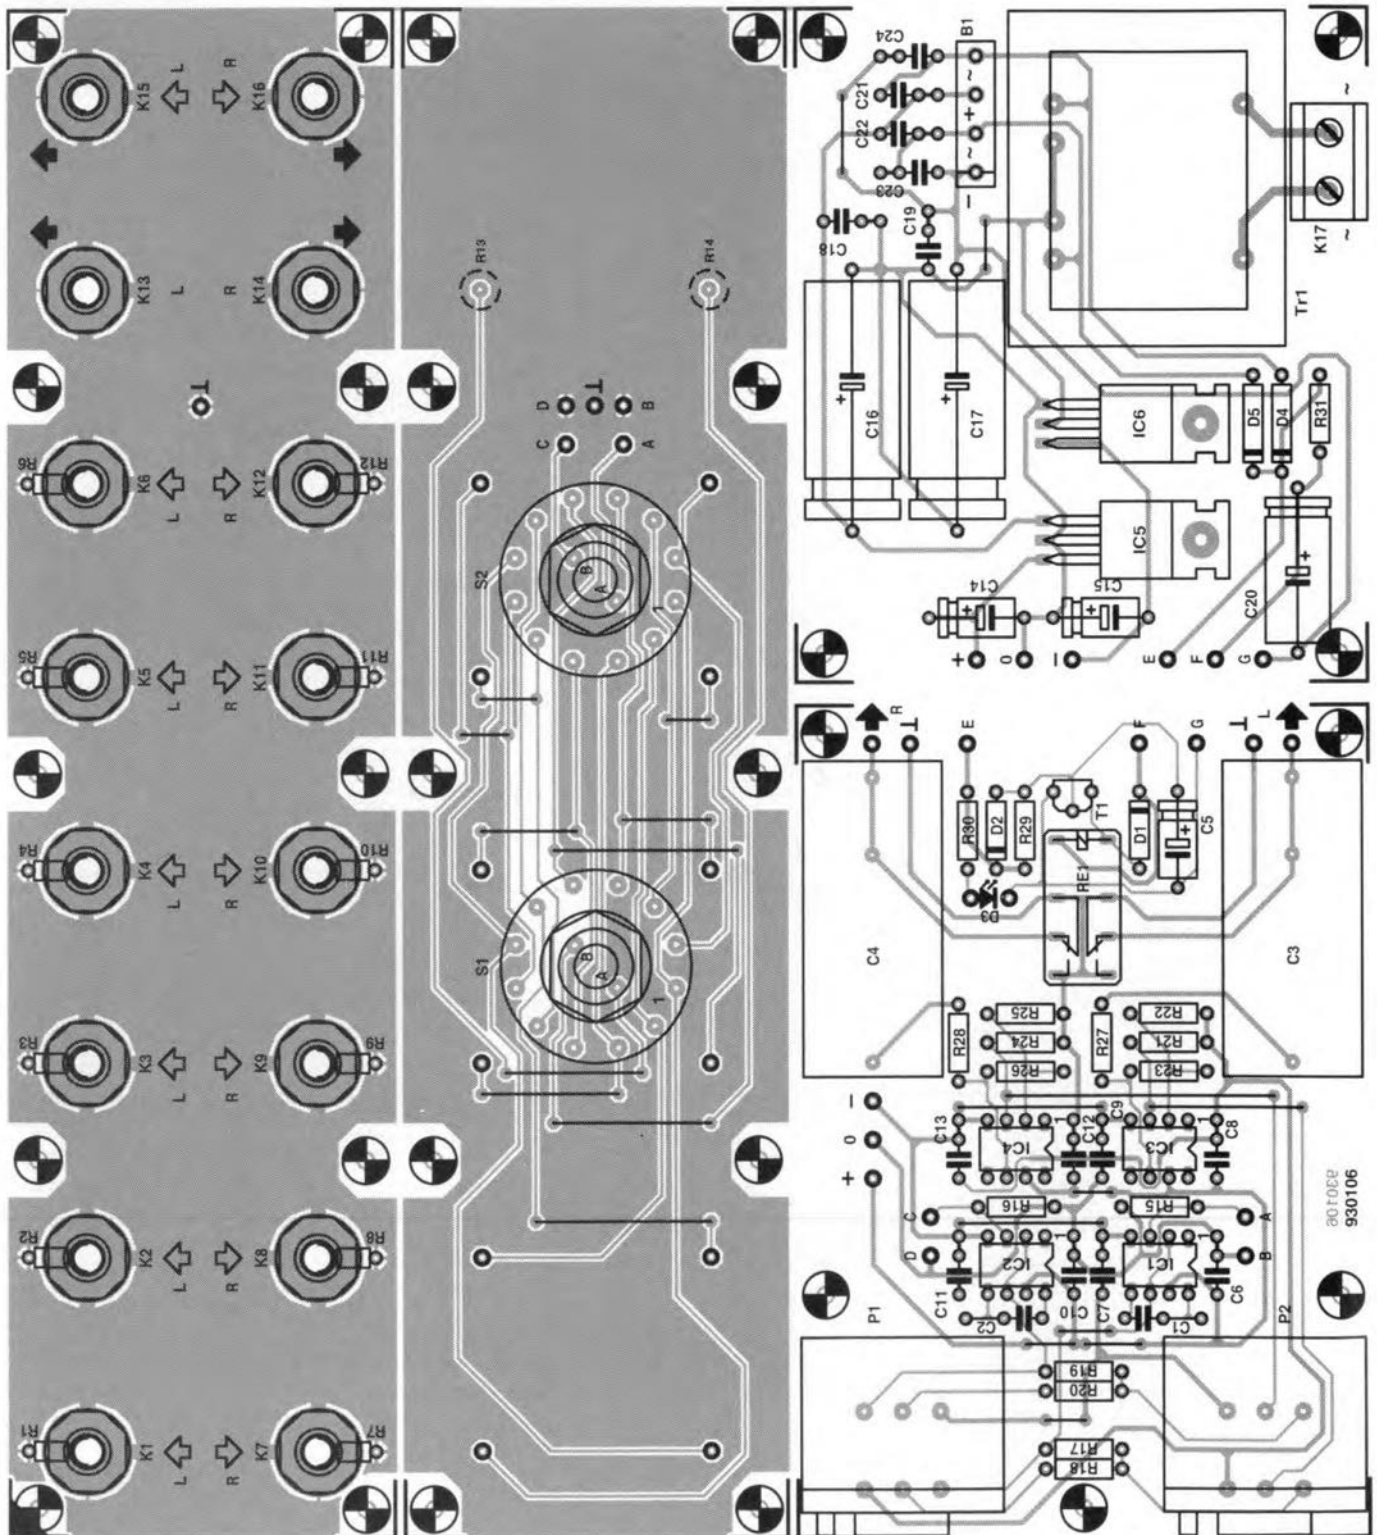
(a). Printed circuit board (component layout) for the mini preamplifier.
